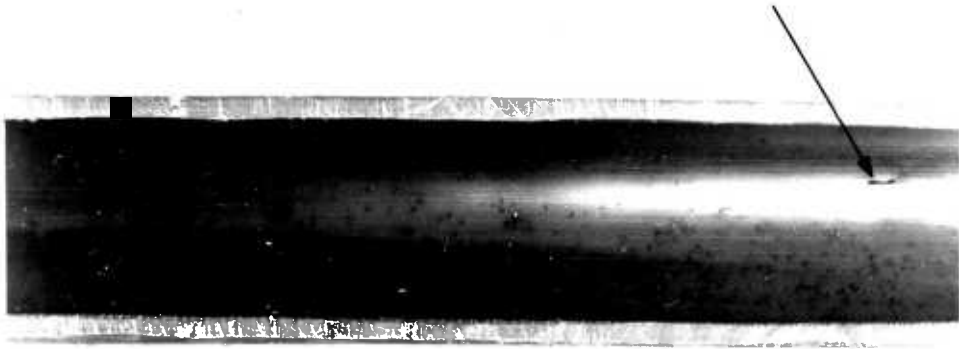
CRACKED GAS PIPE SPECIMEN
